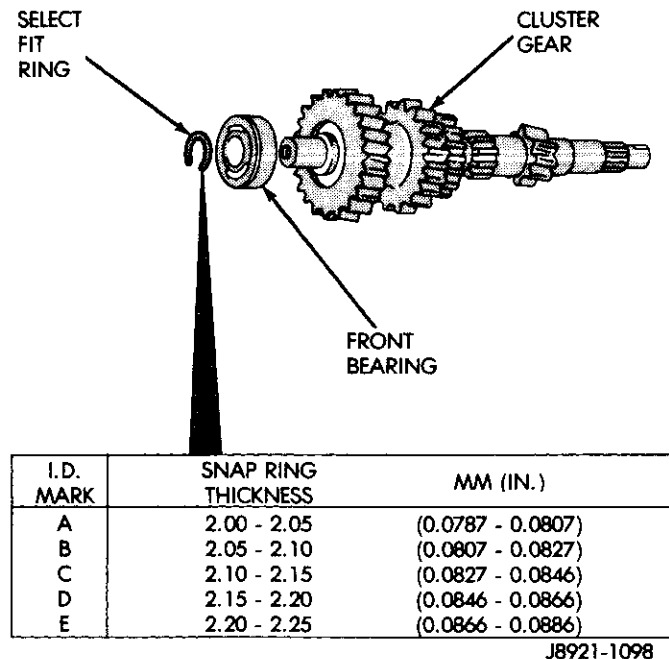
Selecting Cluster Gear Front Bearing Snap Ring
